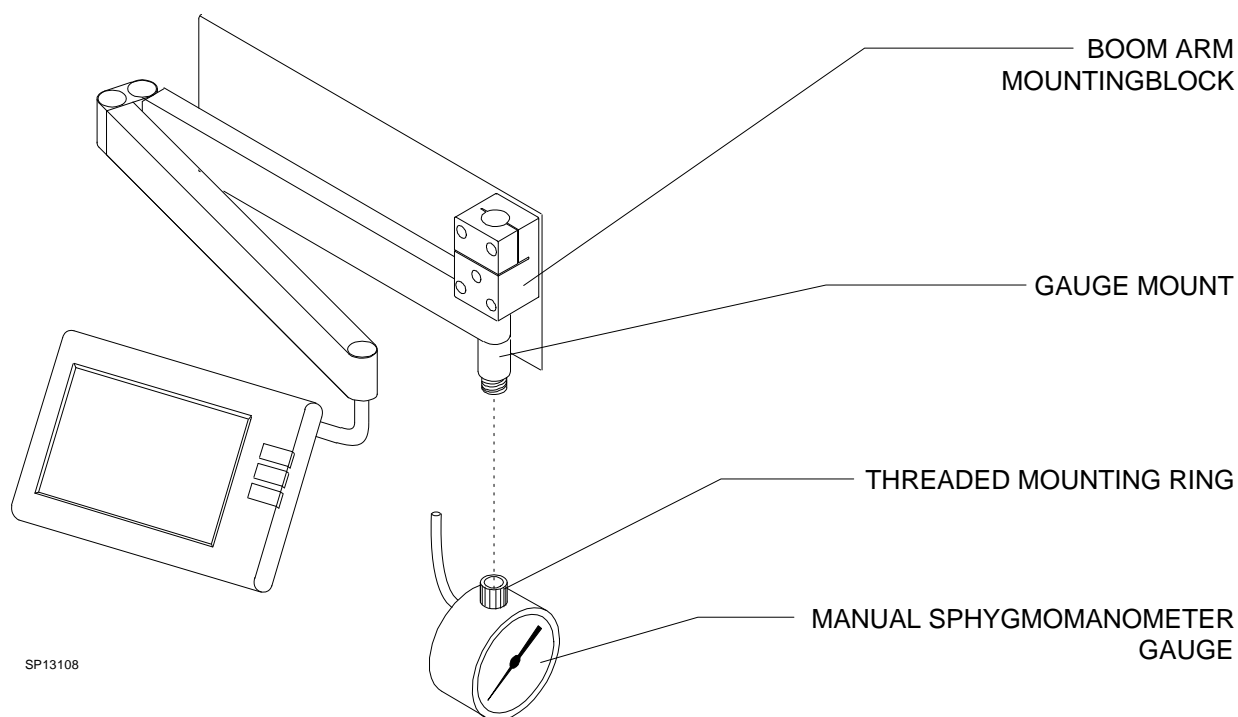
SPHYGMOMANOMETER GAUGE REMOVAL
